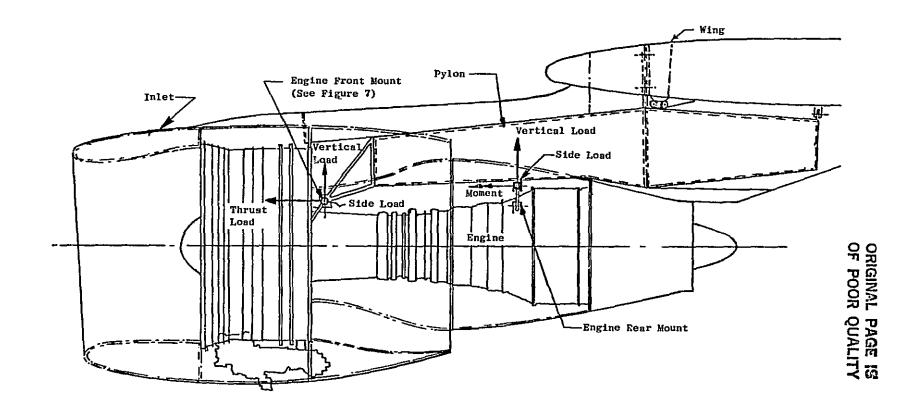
Typical Engine-Nacelle-Pylon-Wing Installation Showing Front and Rear Engine Mounts and Load Paths.
